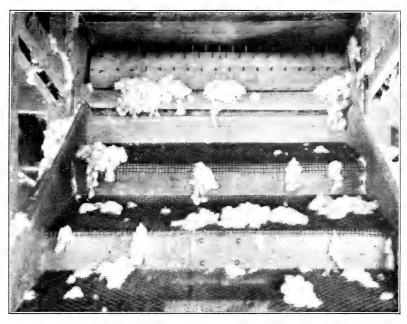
FIG. I.—END VIEW OF A PICKER-ROLL CLEANER WITH SCREEN TO REMOVE DIRT AND LEAF TRASH
